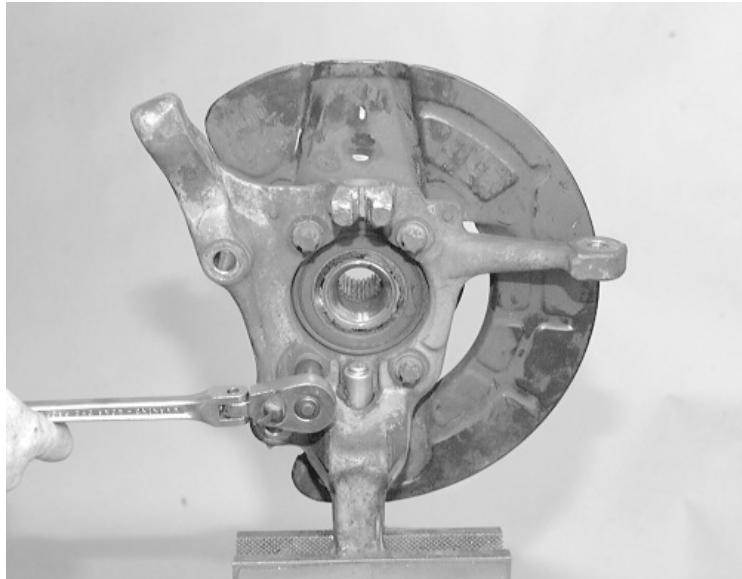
Remove the four hub retaining bolts-although shown removed from the spindle, this can be done on the car
